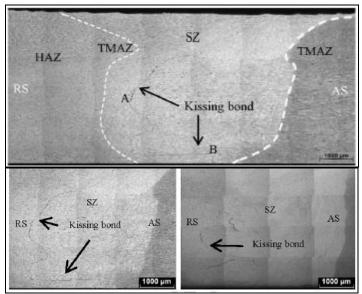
Cross-section images taken from Zhou et al. study [86] showing the kissing bond defect formation at retreating side in the stir zone of AA5083-H112 friction stir butt welds.
